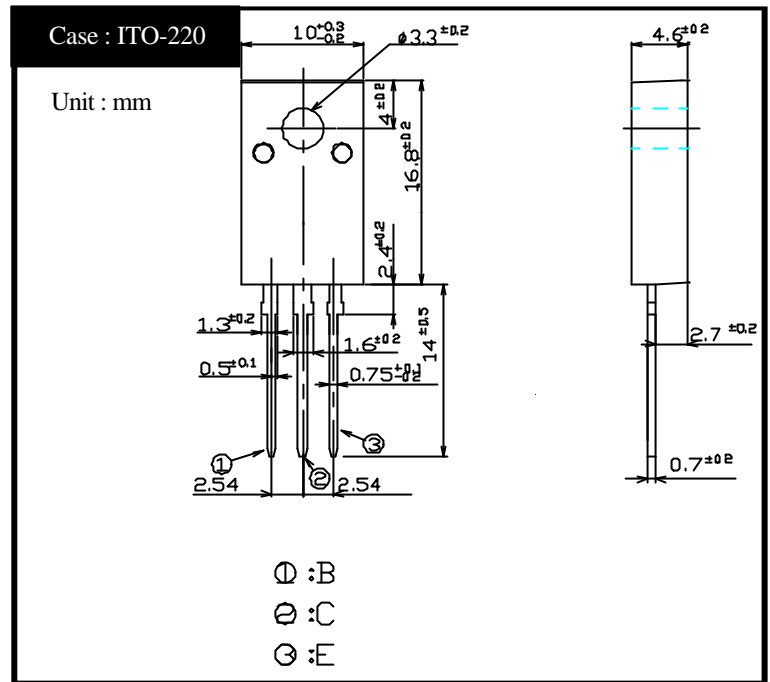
Outline dimensions (unindicated tolerance: ± 0.20 mm)
